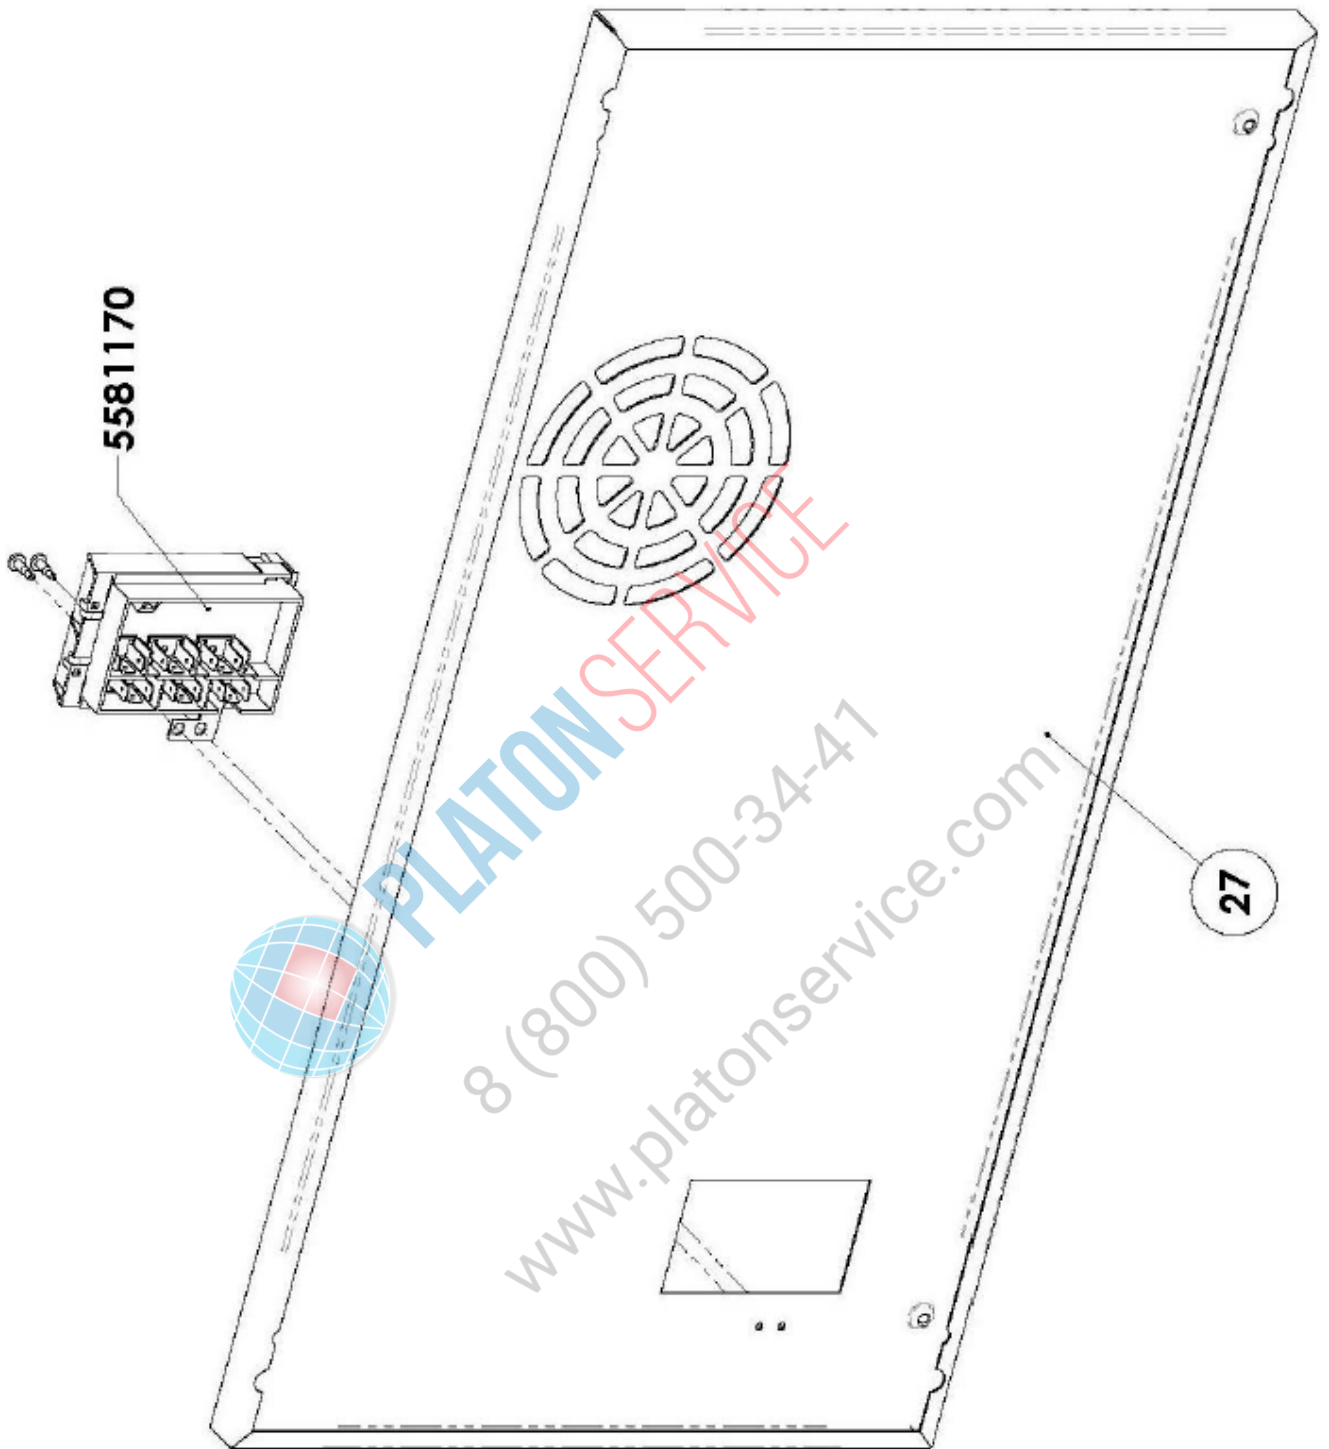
DEVIL 33 / DEVIL 45 - exploded view
